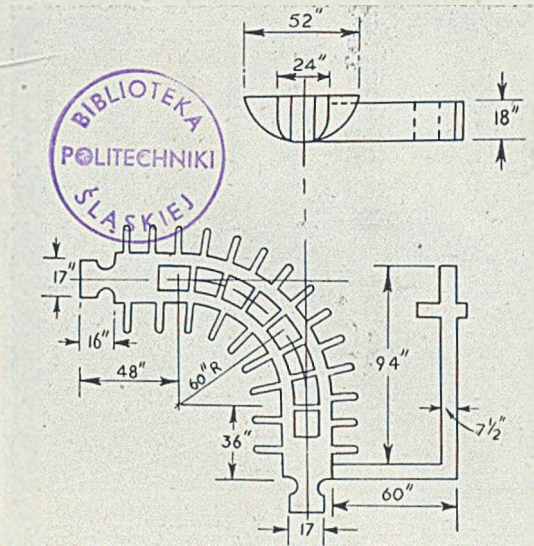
SKETCH OF THE CORE IRON FOR THE LARGE FOOT BEND PIPE CASTING.
